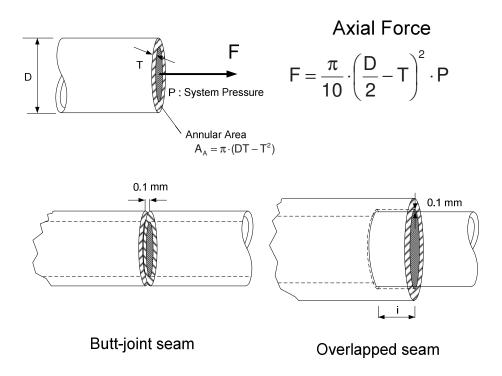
Principle shape variations of a brazed connection and the axial load
